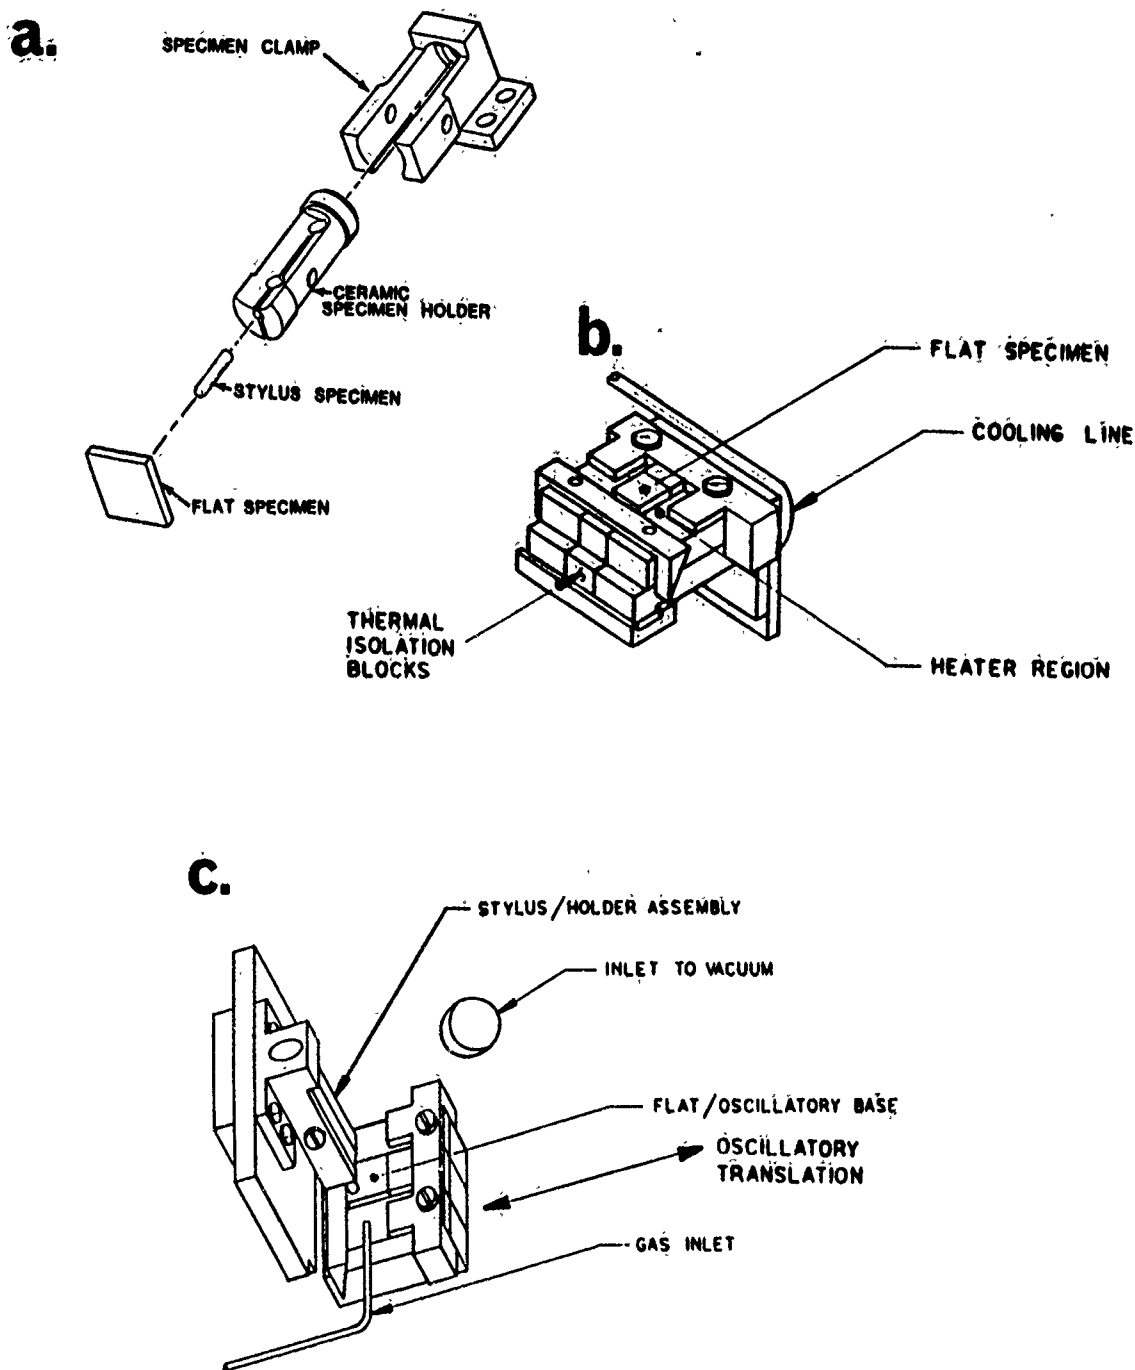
Schematics of HT-SEM pin and flat specimen combinations and their specimen holders; (a) pin assembly; (b) flat installed in thermally isolated heater block; (c) stationary pin vs. oscillating flat assembly with gas inlet near the contact zone.
